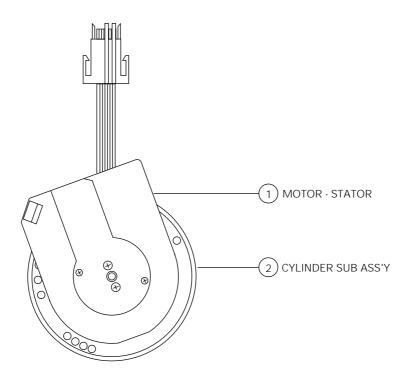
Assembly of Motor Stator and Cylinder Sub Ass'y
